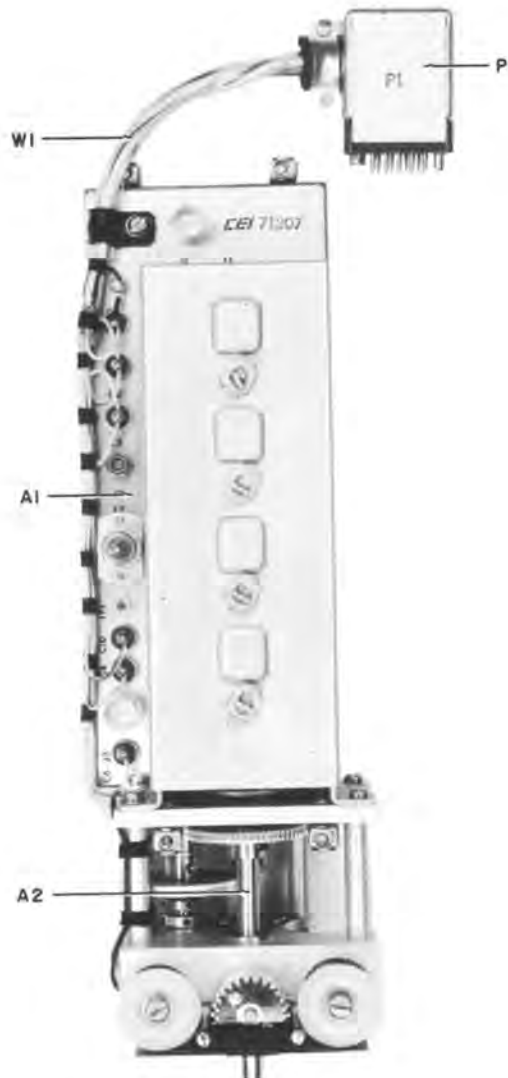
Type 71207 20-70-MHz RF Tuner Assembly, Component Locations
